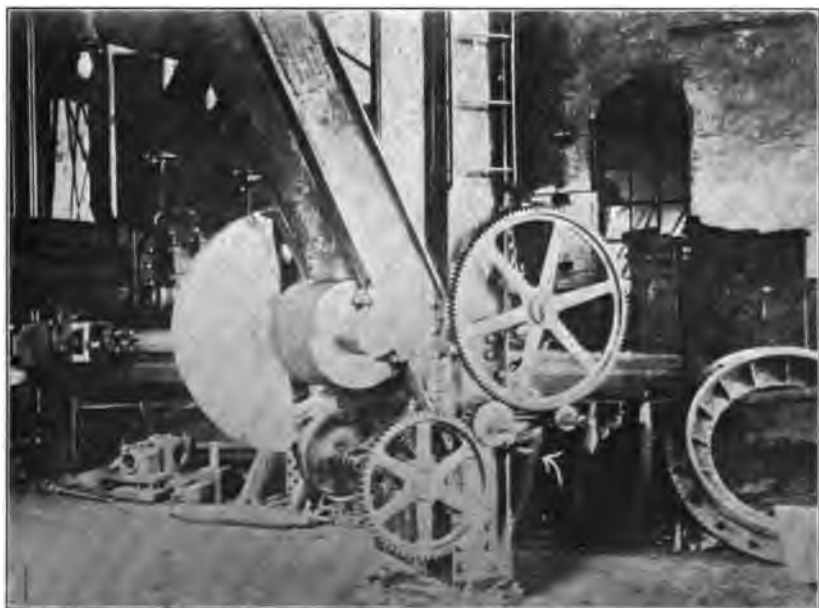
A hand jib crane with gears and gear wheels dangerously exposed to contact.
